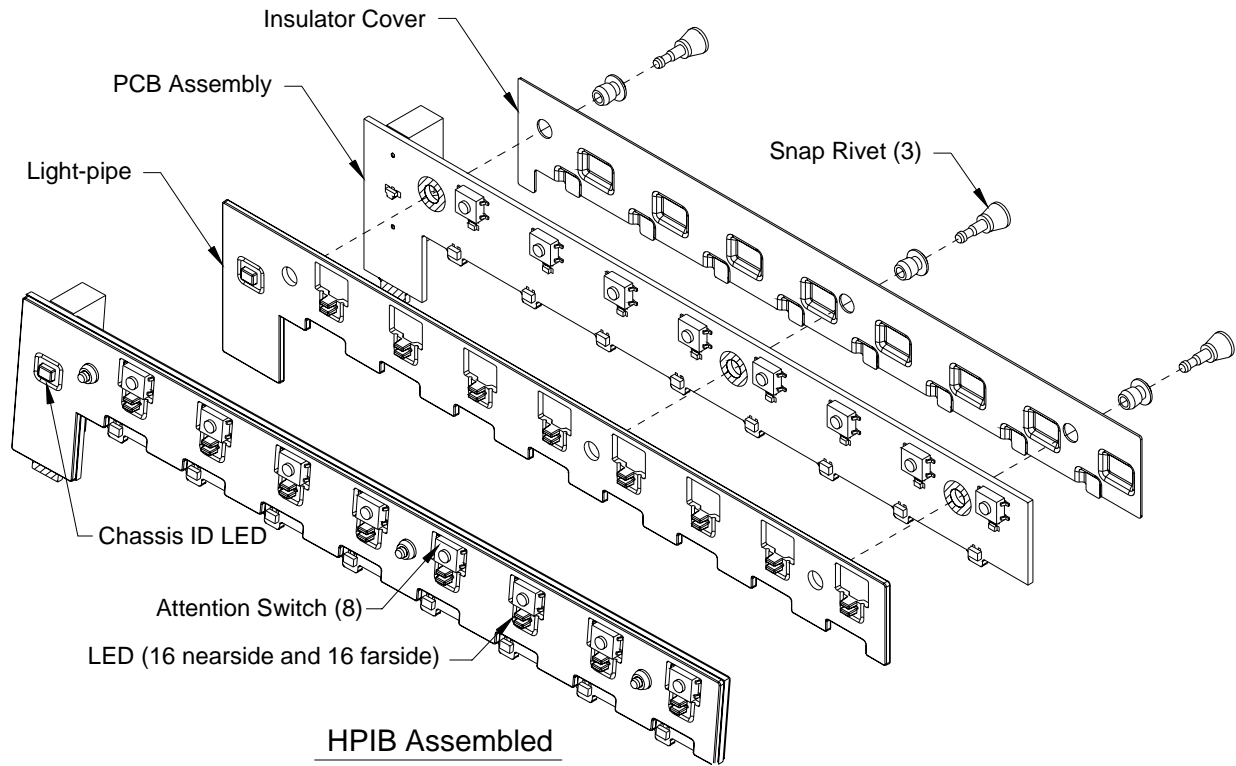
Mechanical Outline of PCI Hot-Plug Indicator Board (HPIB)
